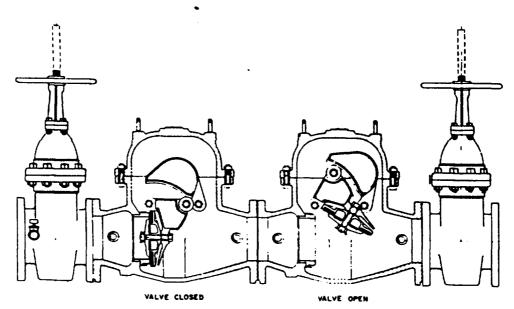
RISING STEM GATE VALVES FOR FIRE SERVICE HERSEY NO. 1 DOUBLE CHECK VALVE ASSEMBLY (SIZES 2" - 10" x 12")
